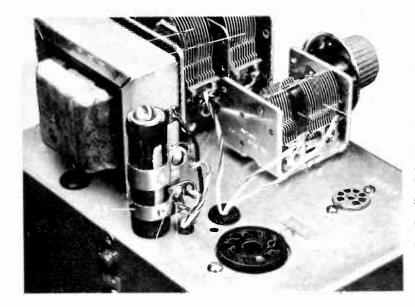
Closeup of top of chassis shows mounting of B+ voltage-divider power resistor R3. Mount R3 with α ¹/₄-20 x 2¹/₂-in. screw. Slider contact "C" is home brew since only one slider is supplied. Make a cover of perforated aluminum to fit over R3 so you don't touch it. If you did you'd get a nasty shock and burn. Both sections of C10 (top) are connected in parallel. C9A is the smaller section of C9.
